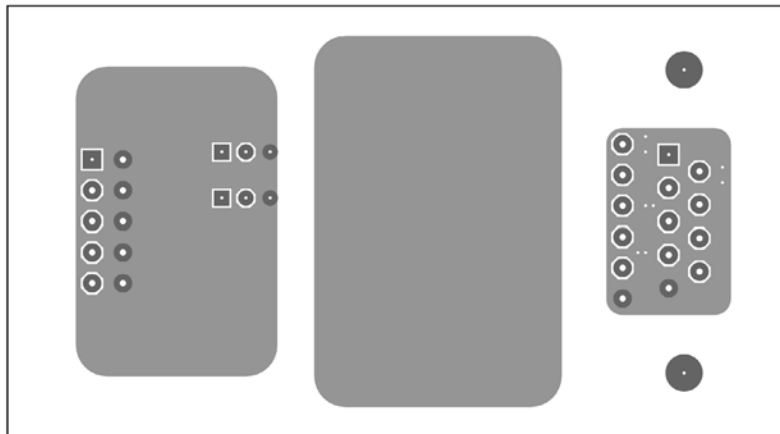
Low EMI Demo Board Layout (DC1747A), Inner Layer 1
